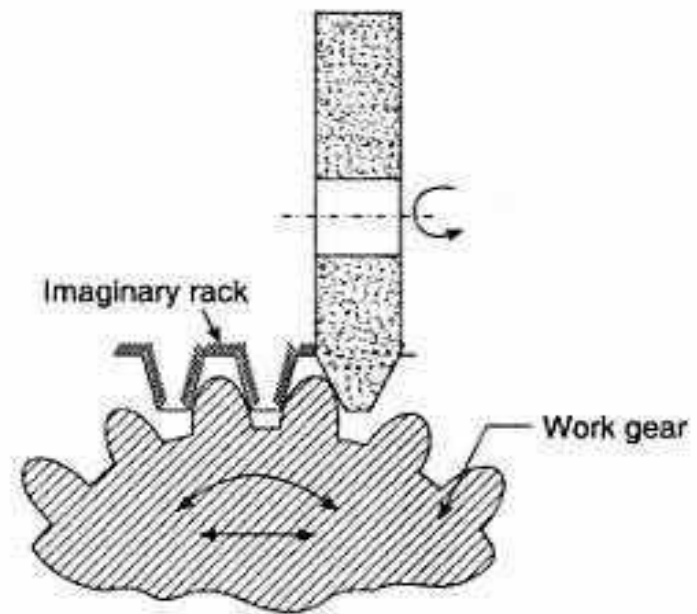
Showing the principle of generation gear grinding. The grinding wheel shown forms one tooth of the imaginary rack.
